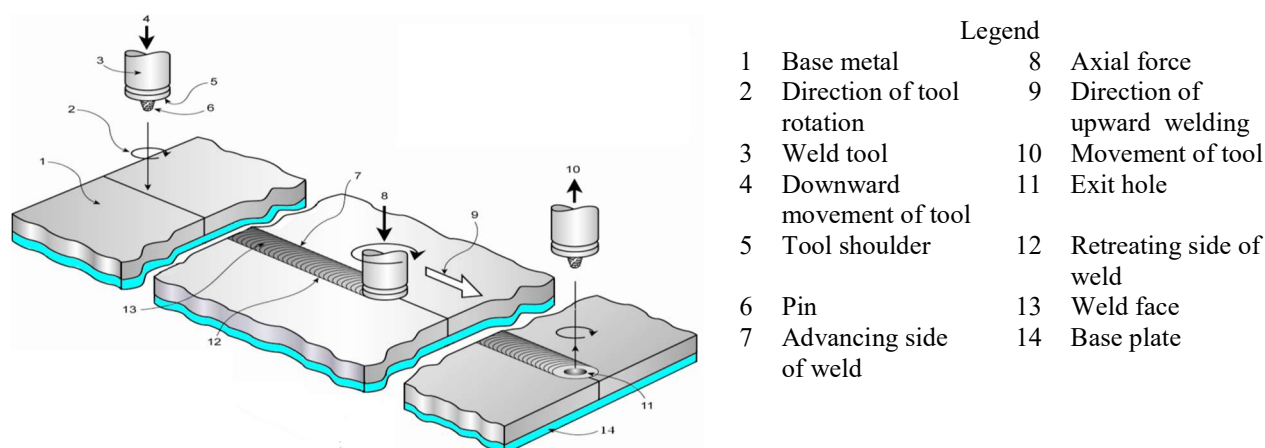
Scheme of the friction stir welding process [3]
